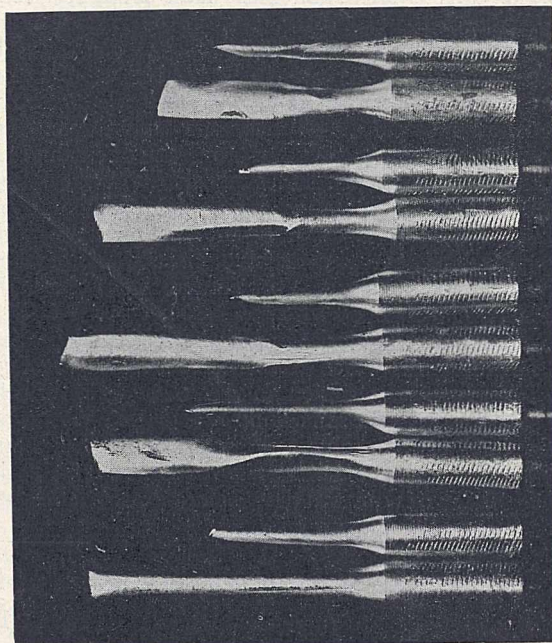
Fractured testpieces of single crystals in round bars, showing how in each case the bar draws down in one dimension and produces a wedge-shaped (double-grooved) fracture. By permission of the Institute of Metals.
